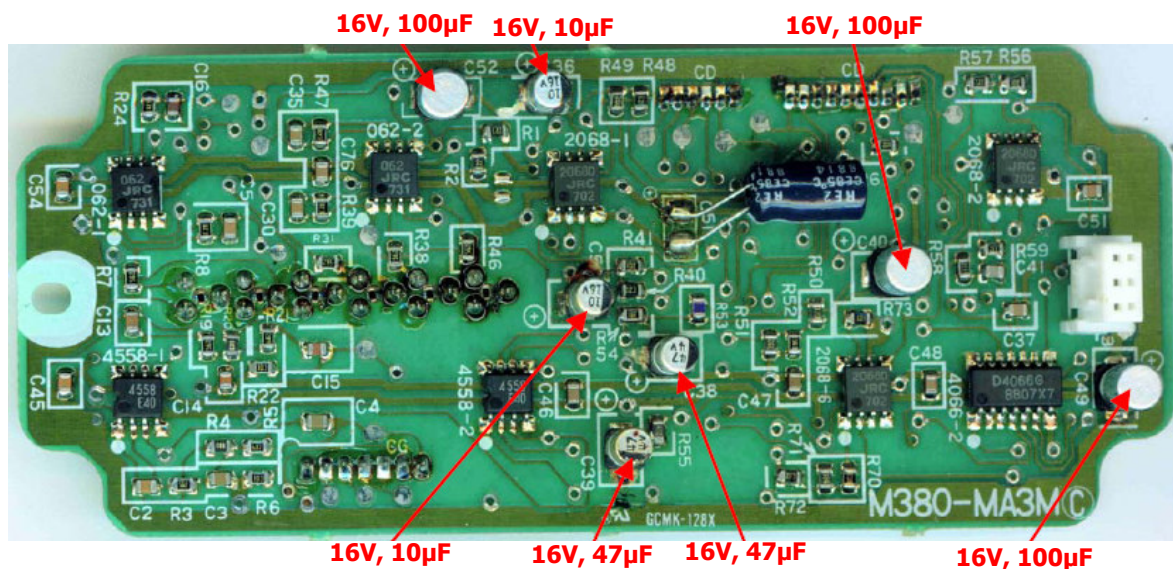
Bottom view of PCB1, replace these capacitors as marked
